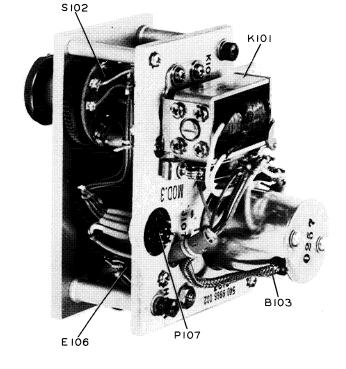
Transceiver 618S-1, Front Panel, Autopositioner Assembly, Right Side View
